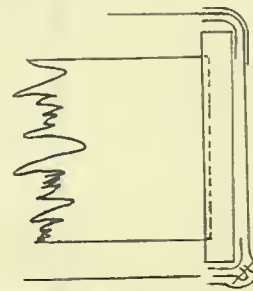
METHOD OF ATTACHING FABRIC AT END RIB
